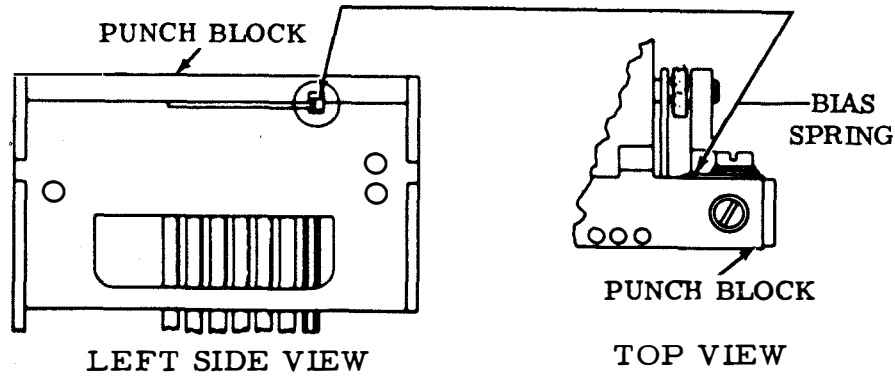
Bias Spring (Punch Block) (For Fully Perforated Tape)
